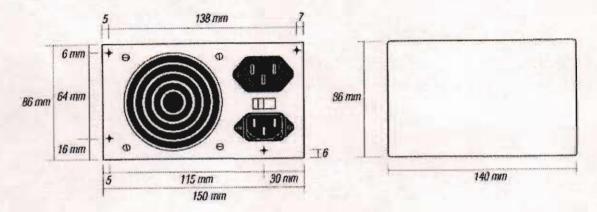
LPX Form Factor Power Supply Dimensions - side and rear view
